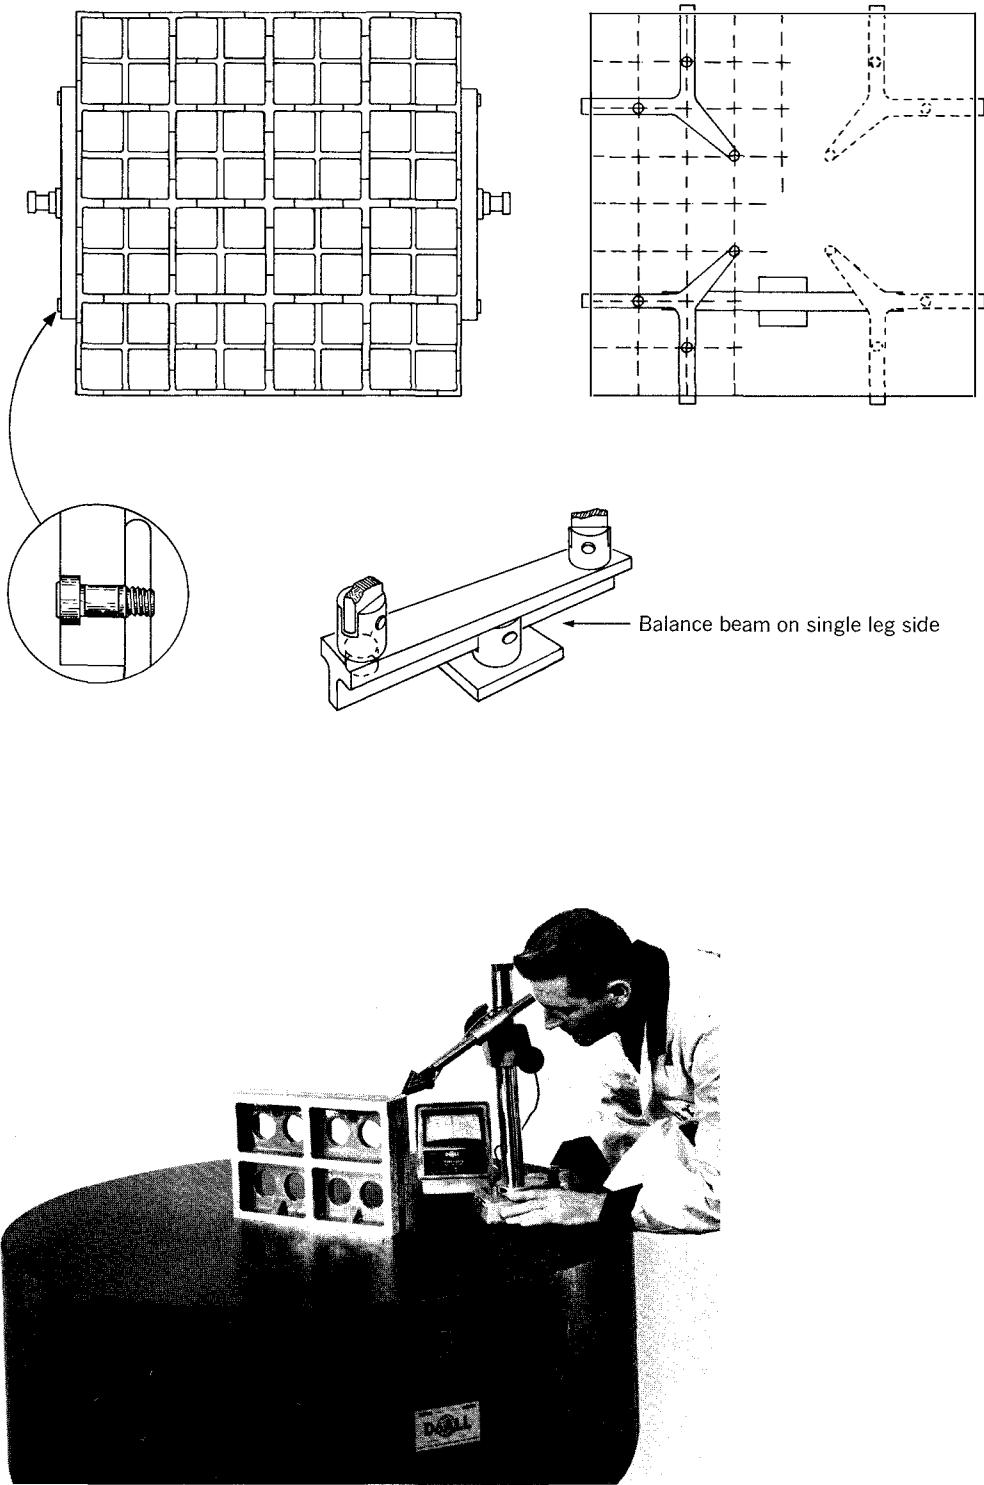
The round shape of the granite surface plate is also geometrically correct for establishing flatness. Granite surface plates are the most familiar form of the flat plane and are convenient for many classes of inspection. The surface plate shown is flat to 50 millionths of an inch [0.0013 mm].
